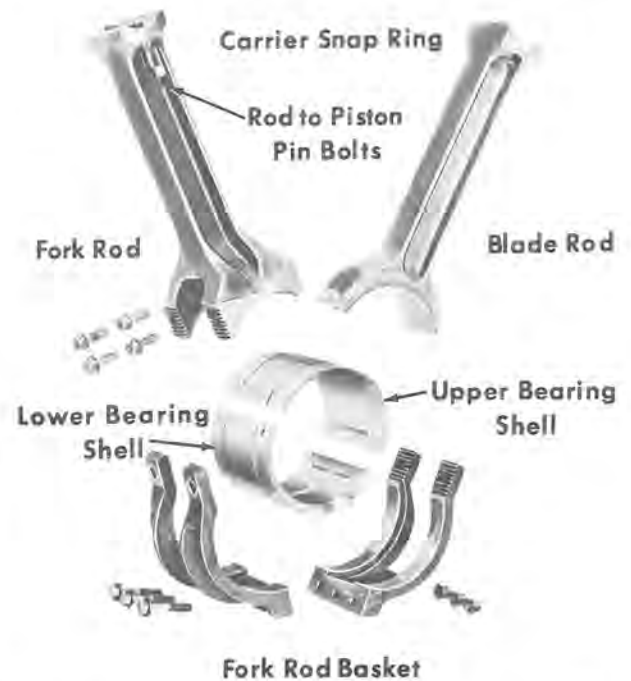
Connecting Rods, Bearing Shells, And Basket
